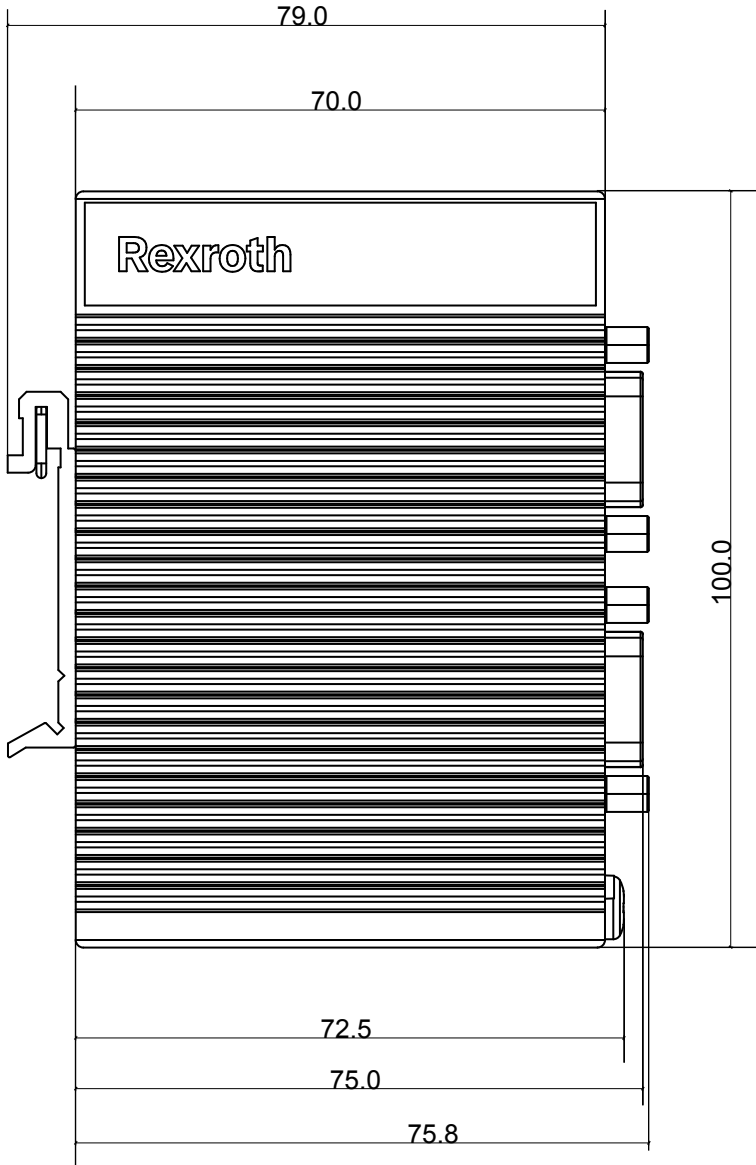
Housing dimensions for device variant NC, top-hat rail mounting, left side view
